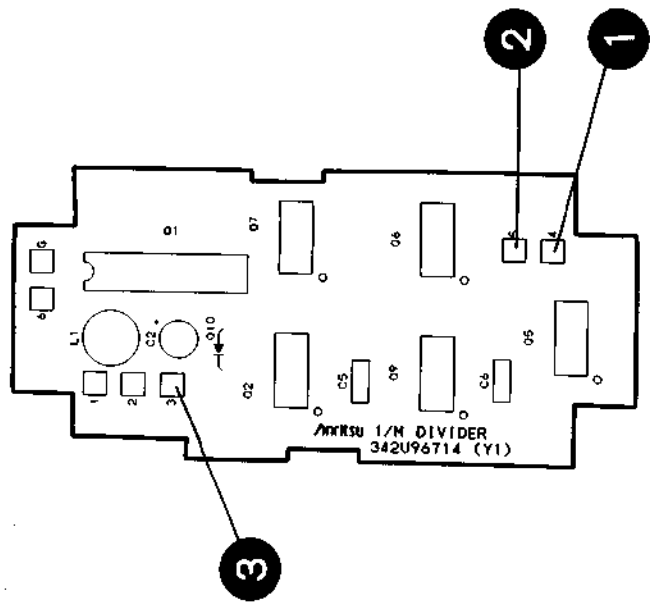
(A3-A3) 1/M DIVIDER PC-Board Parts Layout (Component Side) 22
